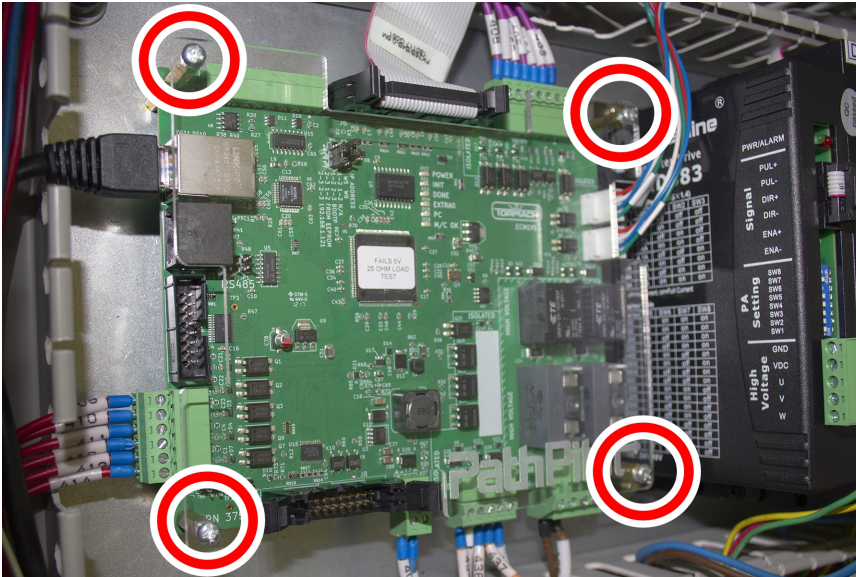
Four Phillips head screws securing the shield to the ECM board.
